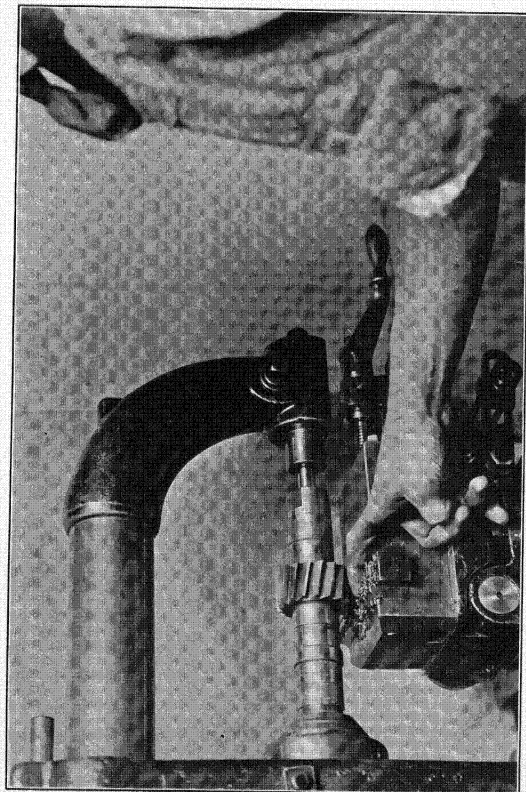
PLATE XIII.—MACHINE SHOP. CUTTER ON MILLING MACHINE, ILLUSTRATING DANGER OF USING FINGER TO CLEAN OUT SHAVINGS.
